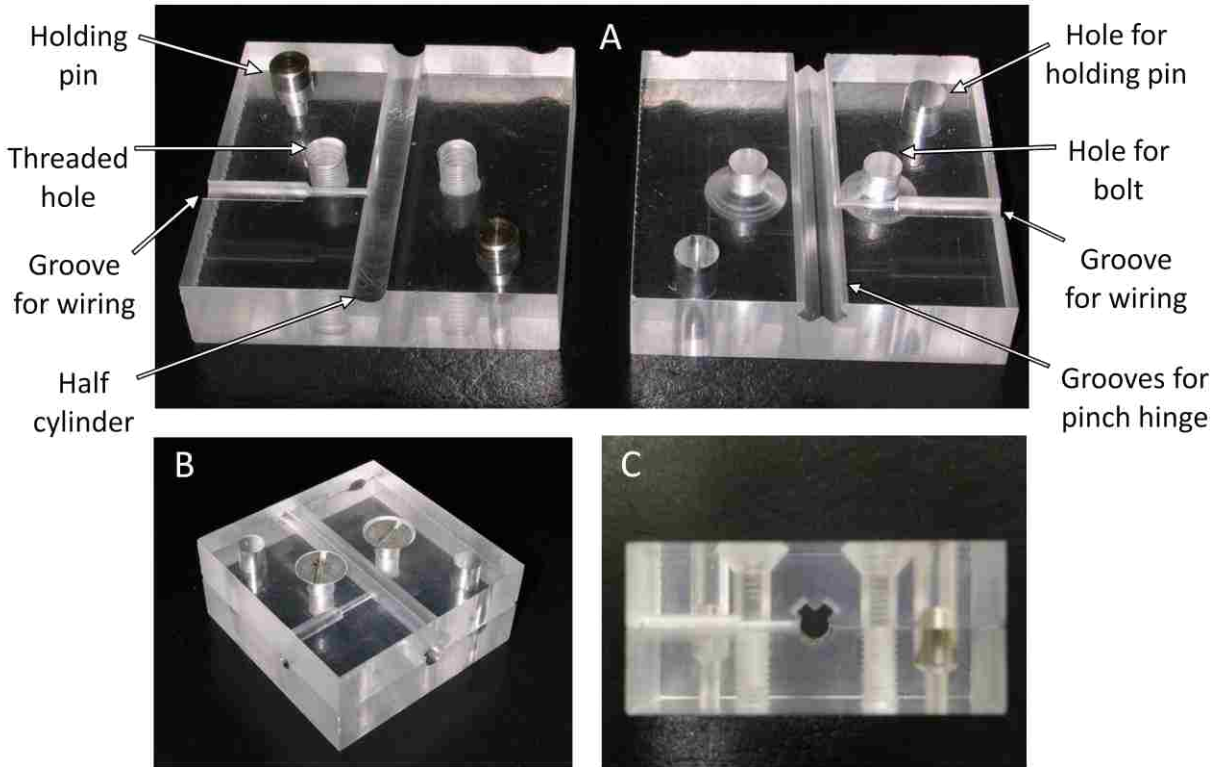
Photographic images of (A) the two parts of the master mold for fabrication of the clip-on micro-cuff electrode; (B) the two parts of the mold clamped together; (C) cross-sectional view of the mold parts clamped together. In addition to the originally envisioned clamp hole-holding pin scheme, a threaded bolt arrangement has been included for enhanced clamping in the most recent embodiment of the master mold. The master mold with both parts clamped together has dimensions of 18 mm (height) x 40 mm (length) x 40 mm (width).
